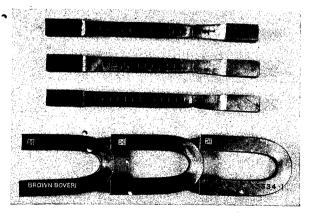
Tensile and bending tests on a welding of boiler plating 42 mm thickness.
